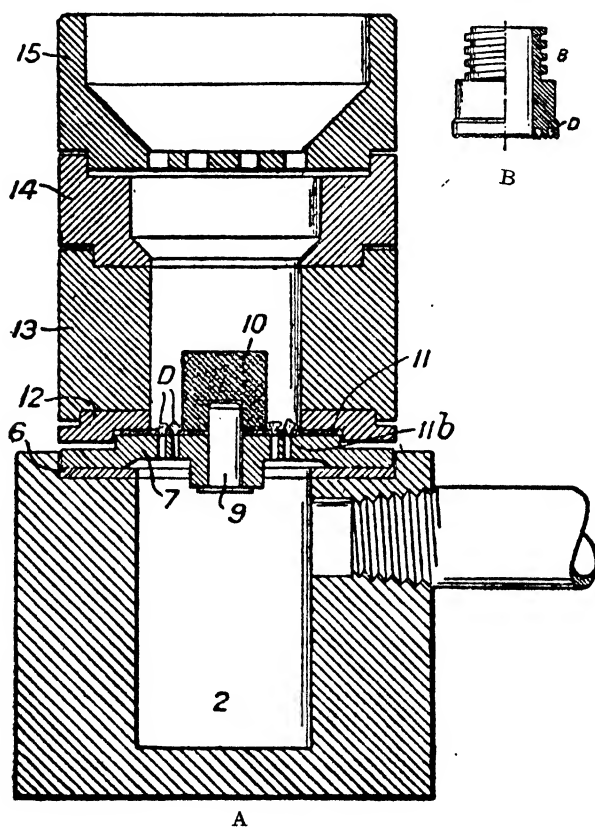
A and B.—Casting metal under vacuum around diamonds. A, construction of the mould and vacuum supply; B, rock-drilling crown finished
